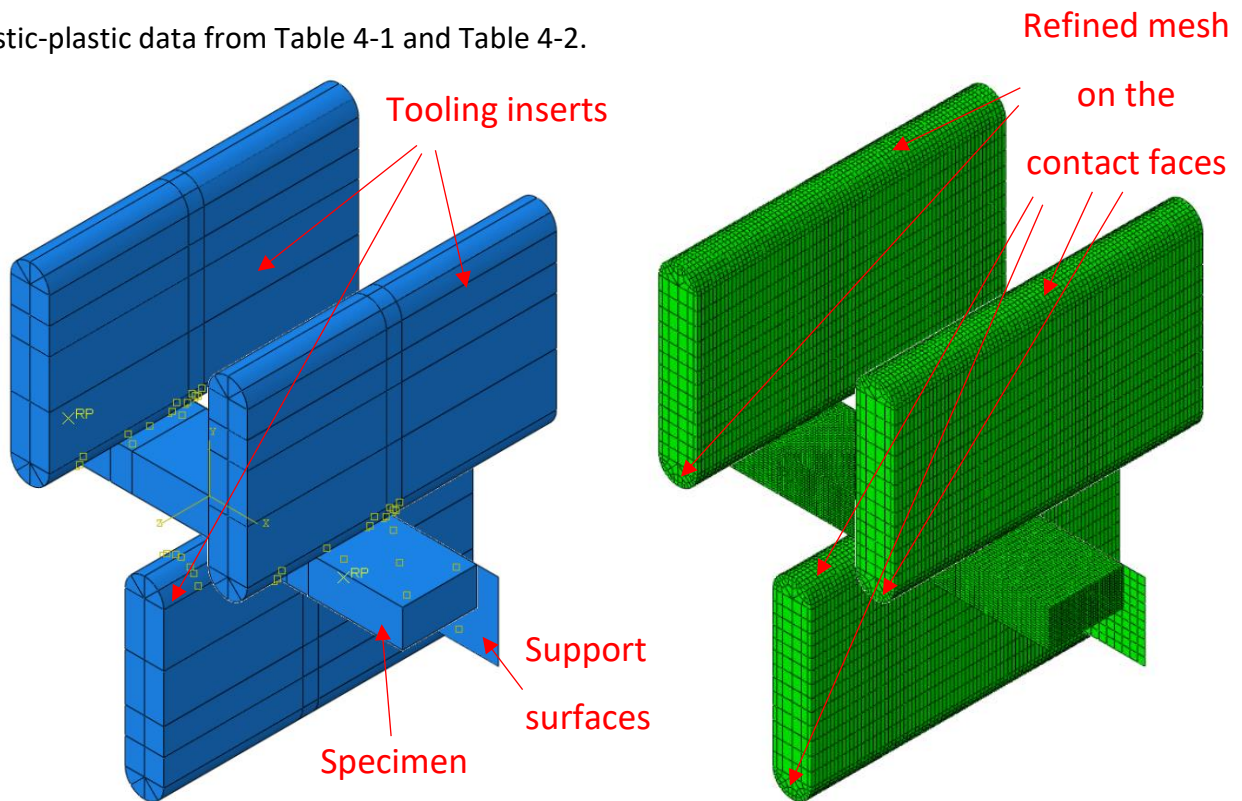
The assembly for the bend test with elastic tooling inserts and 2.4mm thick bend test specimen, left, interactions between the sectioned tooling and the specimen, right, meshed assembly with 0.125mm mesh on the contact faces and the specimen and 0.5mm on the regions of the pin with no contact.
